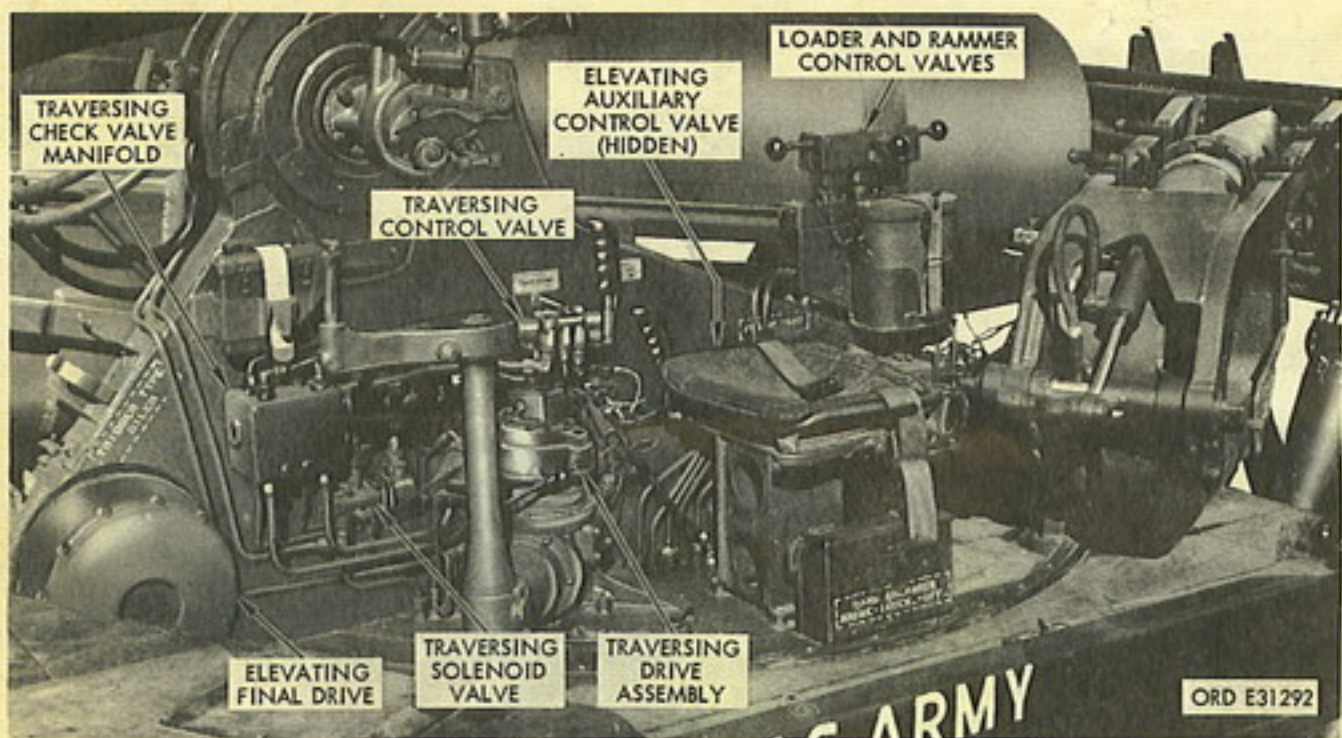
TURRET - LEFT FRONT VIEW (TURRET INSTALLED).
